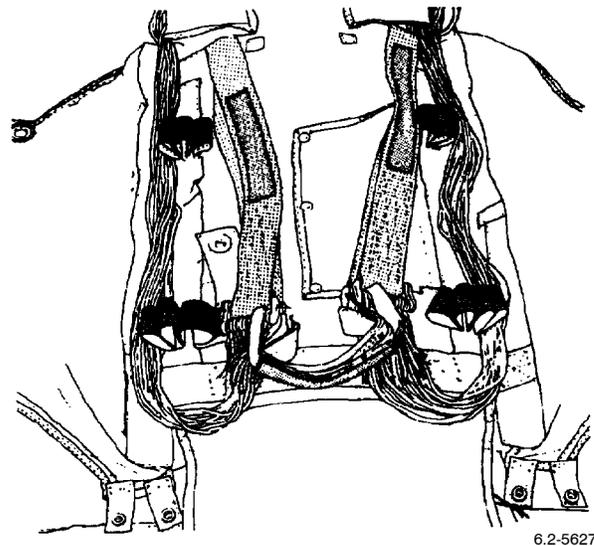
Attachment of Ripcord Housing and Spacer to Container Base
